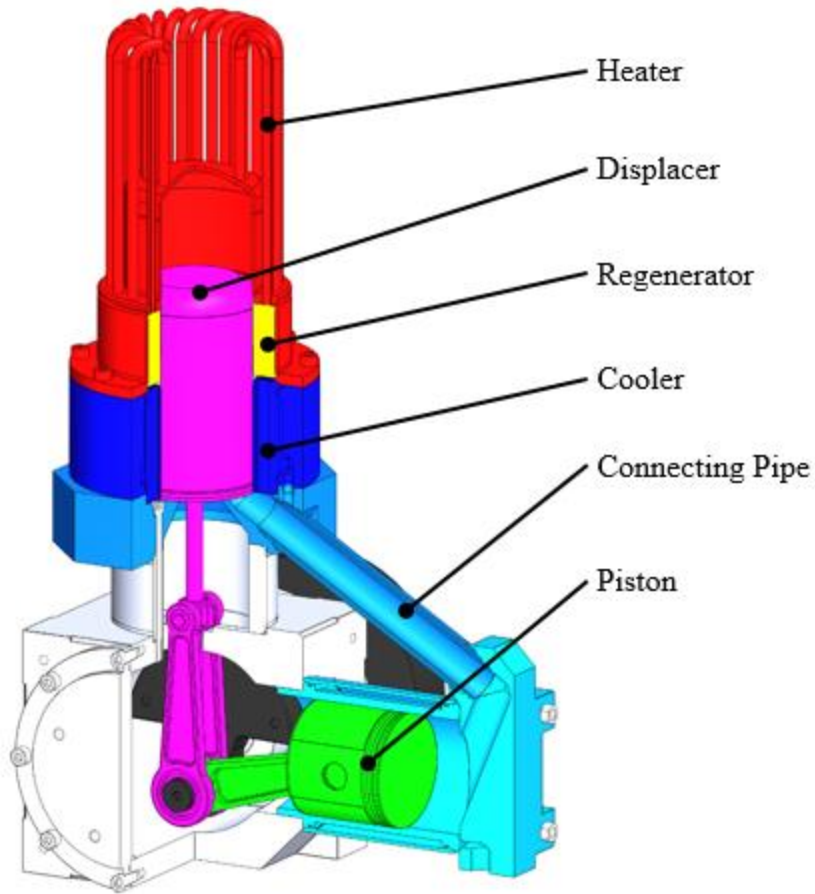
CAD model of the original ST05G-CNC Stirling engine.
